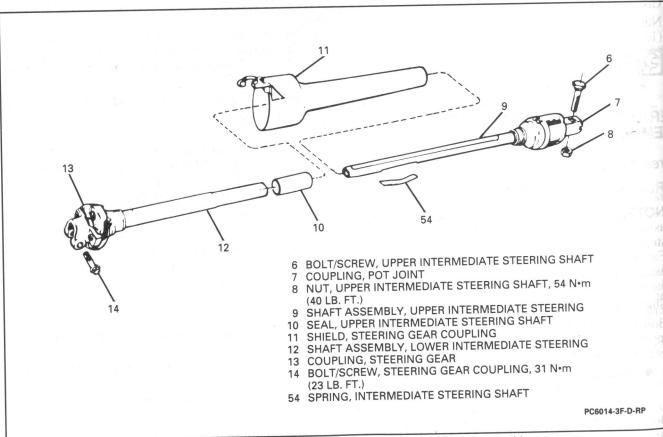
Disassembling Intermediate Steering Shaft Assembly
